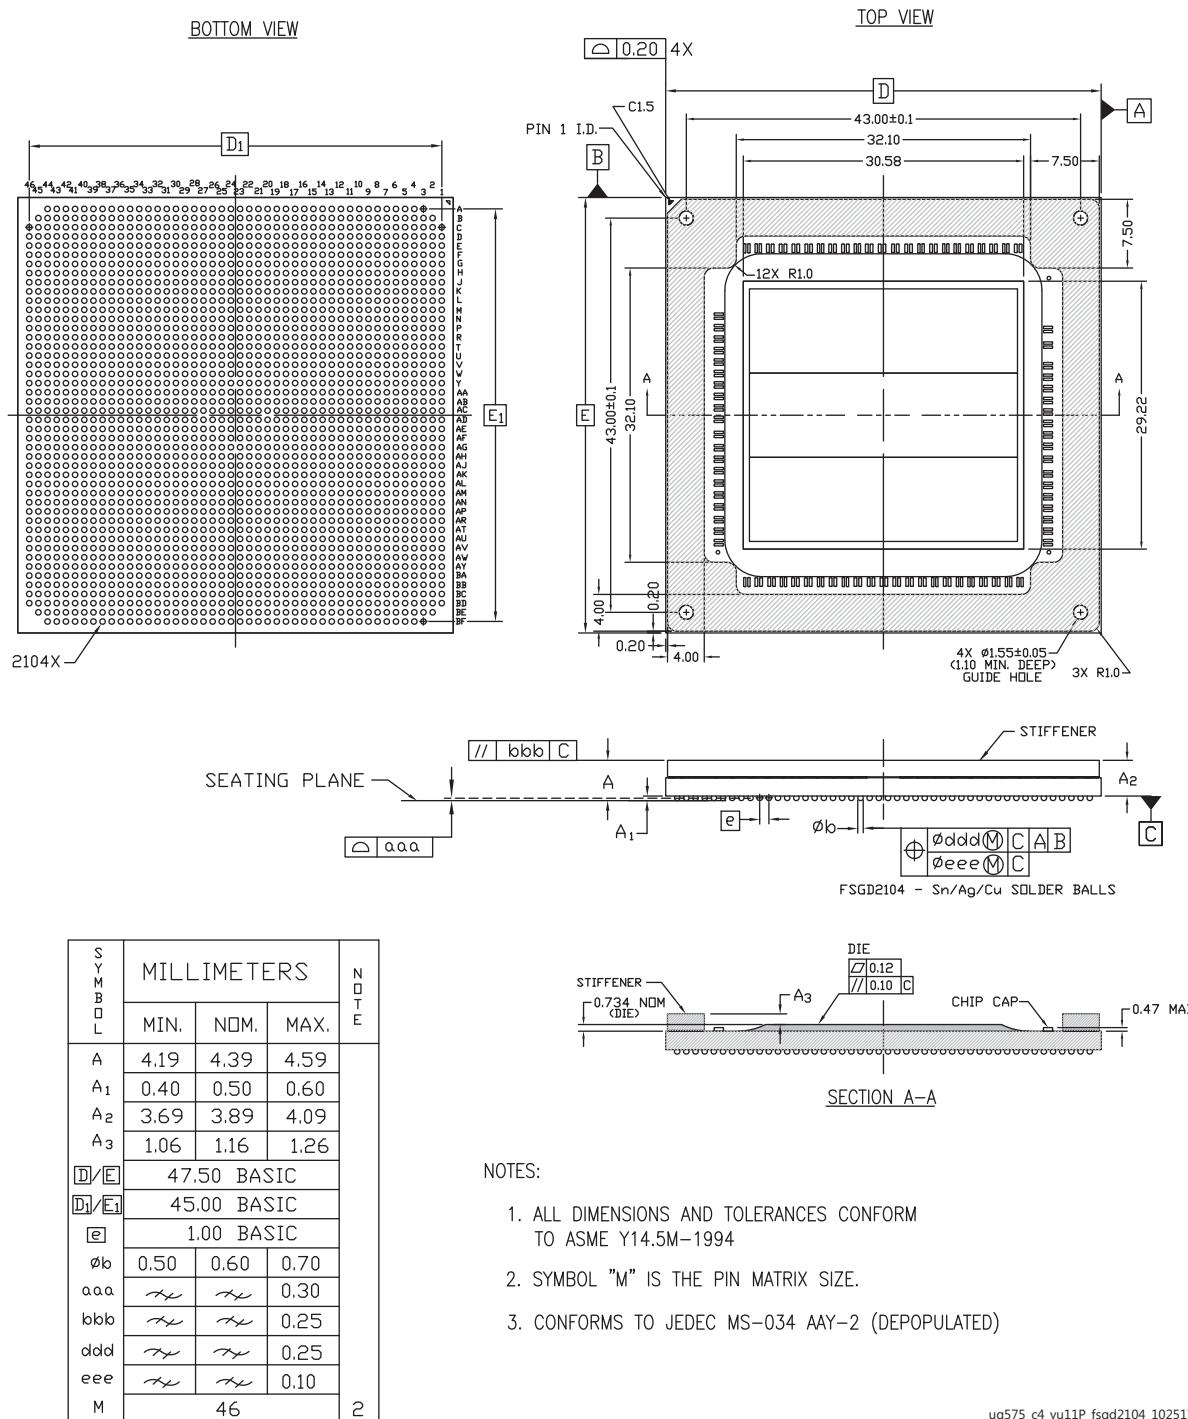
Package Dimensions for FSGD2104 (XCVU11P)
